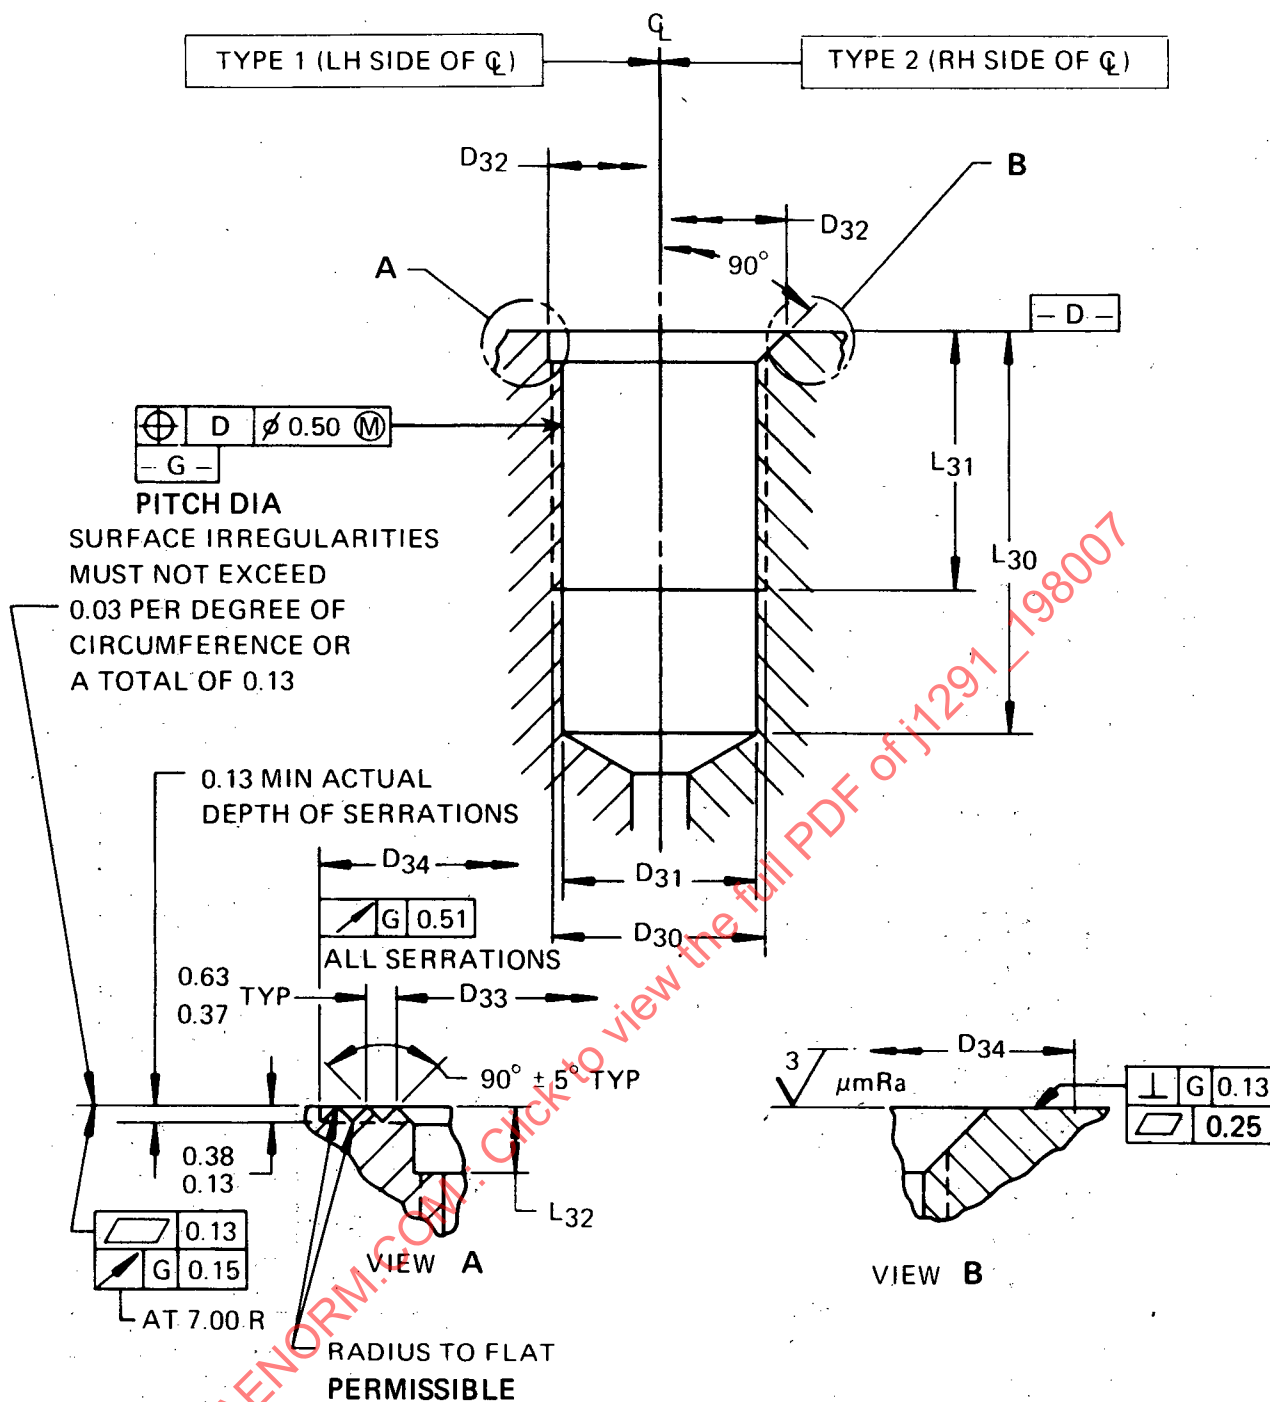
THREADED PORTS FOR BANJO BOLTS (mm)
